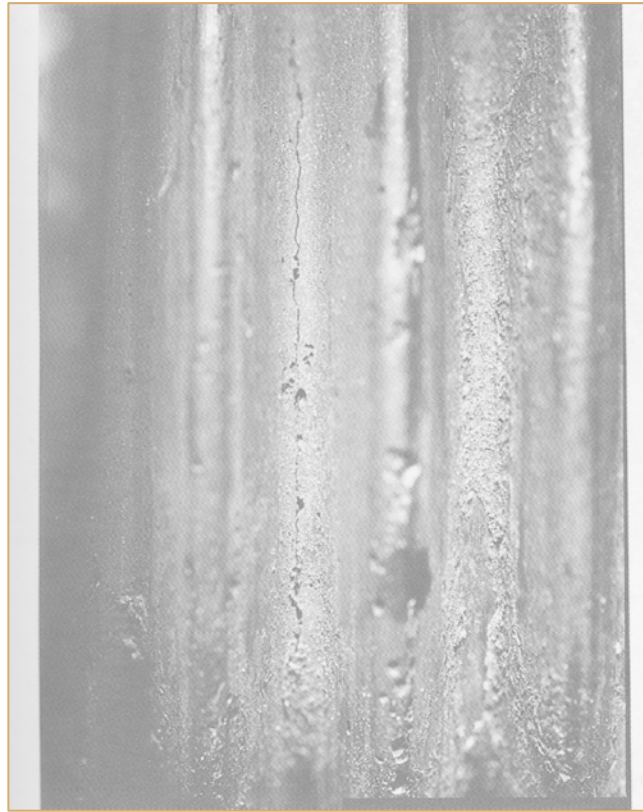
Visual examination of a crack located in the bottom of a thread [Mousset, 1990].
